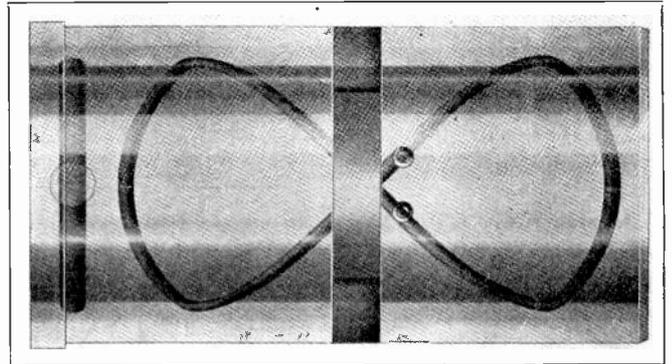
Phantom view of sleeve bearing, showing oil grooves and oil ring slot.
